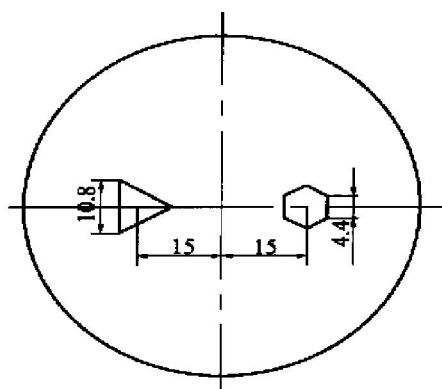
Die layout of extrusion test 4 (Unit: mm)
